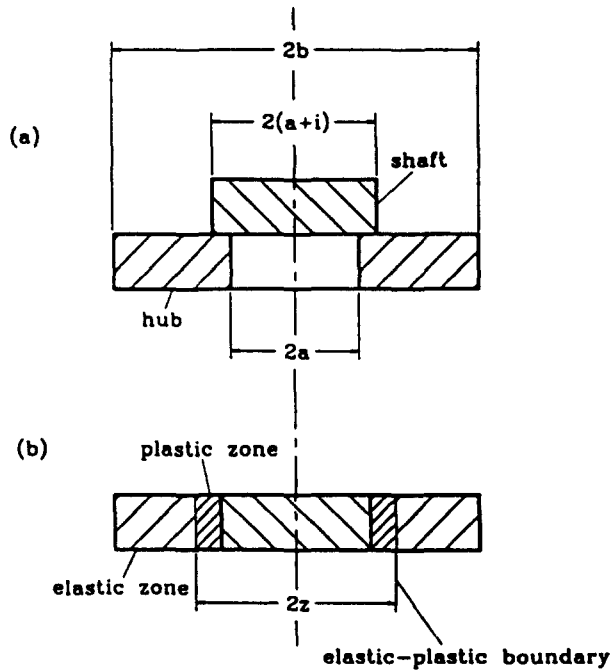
Shrink fit: (a) prior to, and (b) after assembly.
